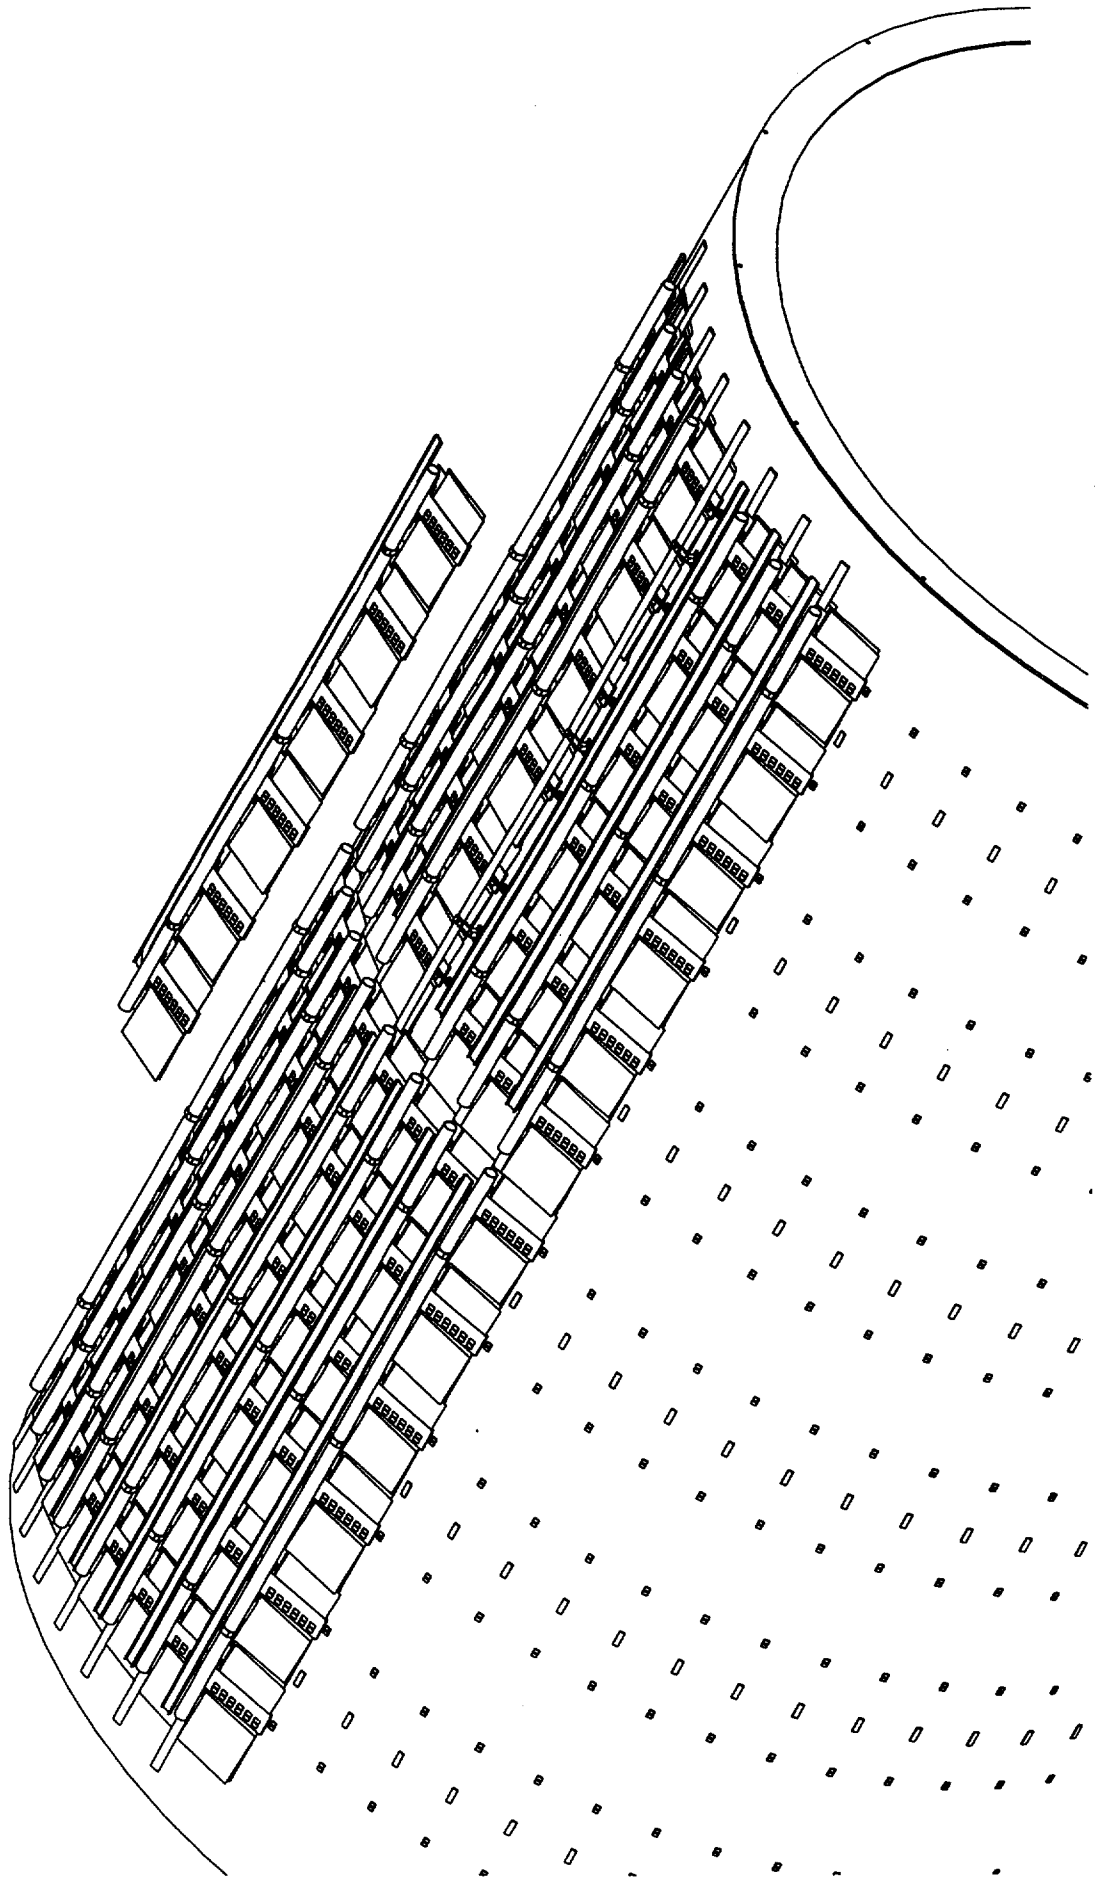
Local support subassembly of 6 or 12 modules, which is then attached to the cylinder.
